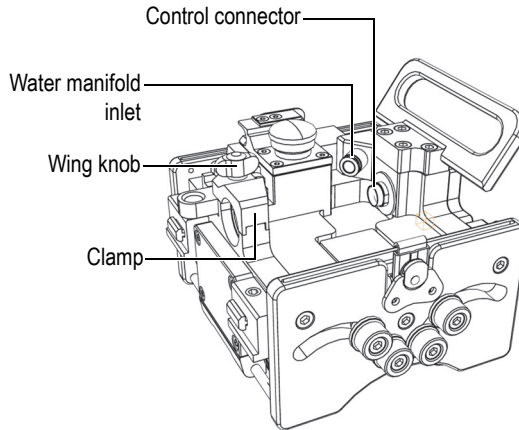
WeldROVER—umbilical fastening mechanism and connectors
